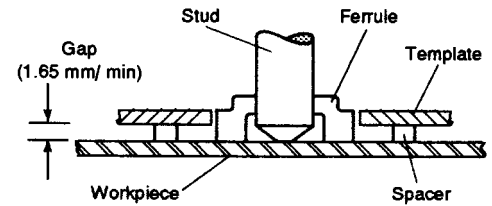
Welding through a template using a ferrule with stud arc welding fasteners
